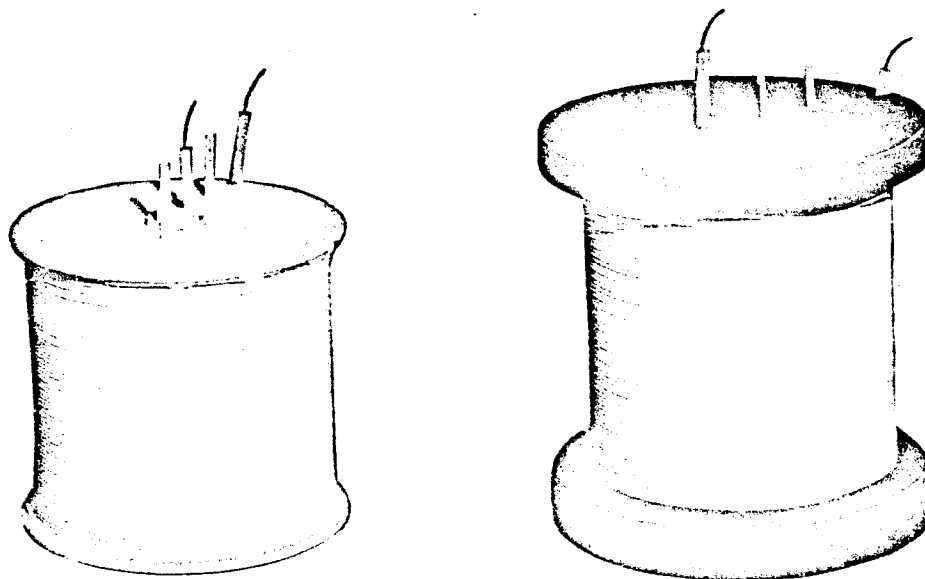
Solenoid Winding Assembly and Solenoid Winding on Arbor After Anadur Bake-Out
